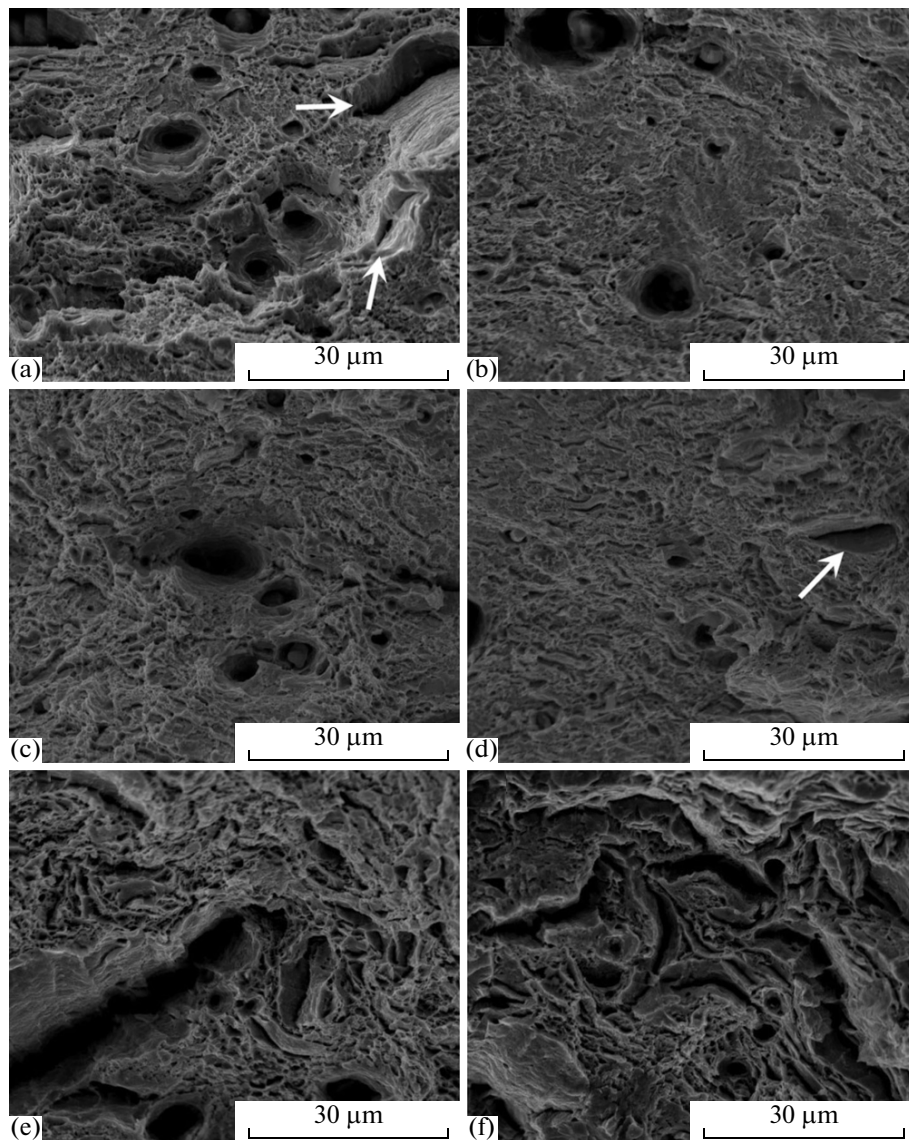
Fractography of fractures of 10Kh9V1M1FBR steel after tensile tests at temperatures of (a) 20 , (b) 0, (c) –20, (d) –60, (e) –100, and (f) –140°C.
